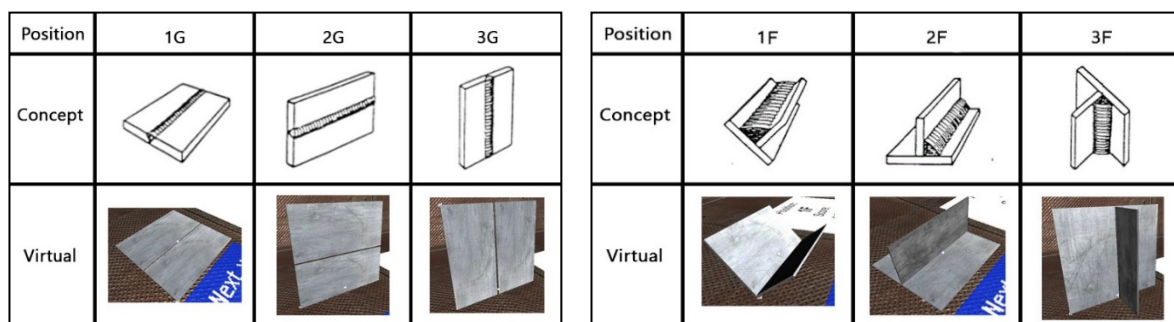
Comparison of the virtual plate design with real concept for groove and fillet welding.
